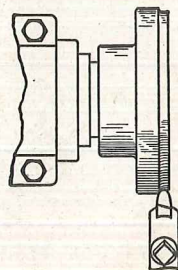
Turning the diameter of the flange of the Chuck Plate on the spindle of the lathe
